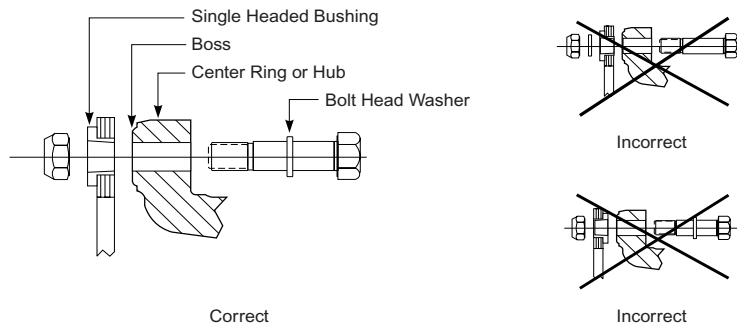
Correct and Incorrect Assembly of the Bolt and Bolt Head Washer with the Center Ring and the TPack Disc Pack Bushing.
